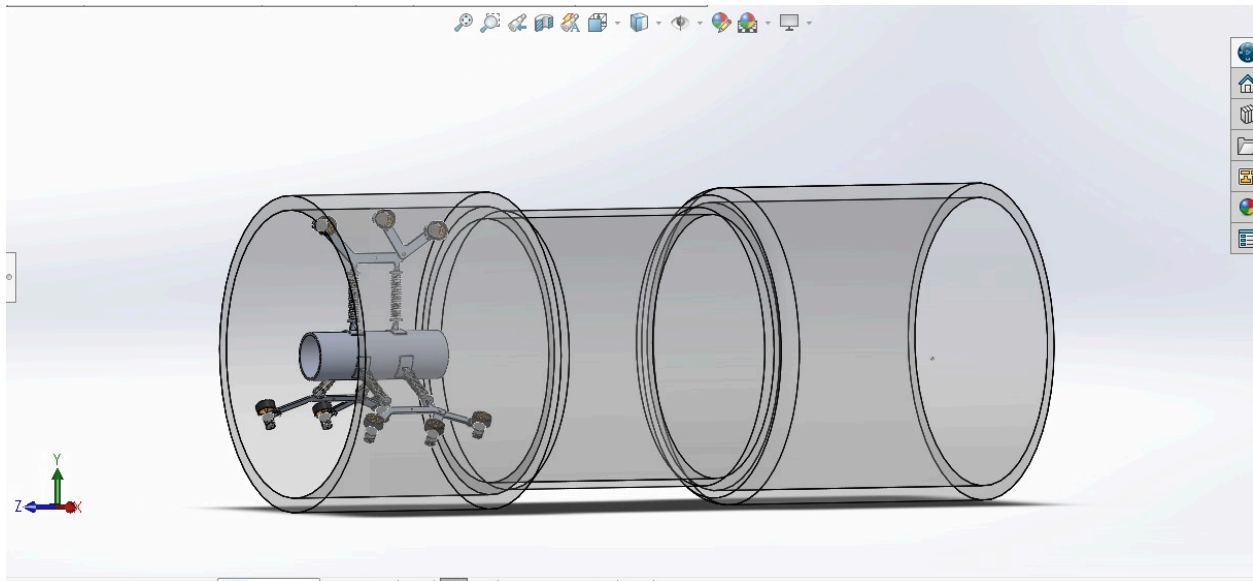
isometric CAD assembly view of an in-pipe robot positioned inside a transparent, multi-section pipeline.
